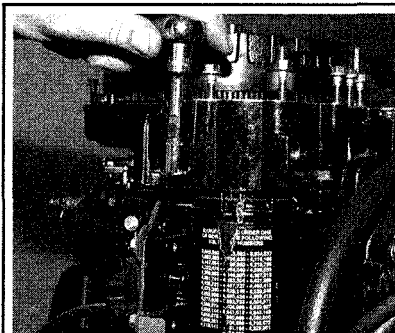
upper retaining bolts (600 powerhead shown)
